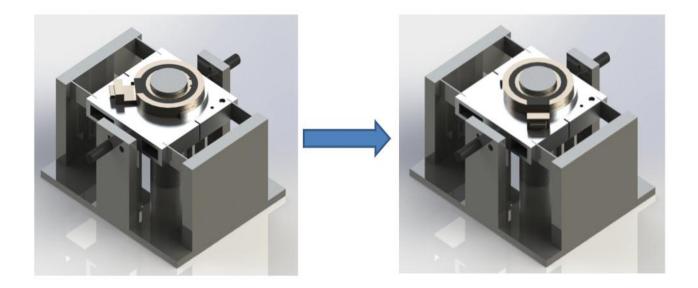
Left position-fixture takes X measurements, right position-fixture takes Y measurements
